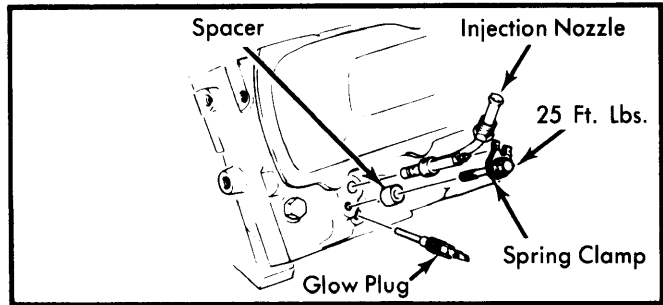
Glow Plug and Injection Nozzle Location (Federal Model)
